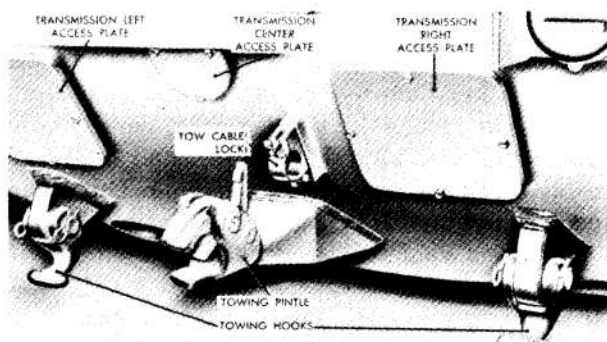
Towing Hooks and Pintle Assembly at Rear of Combat Tank
